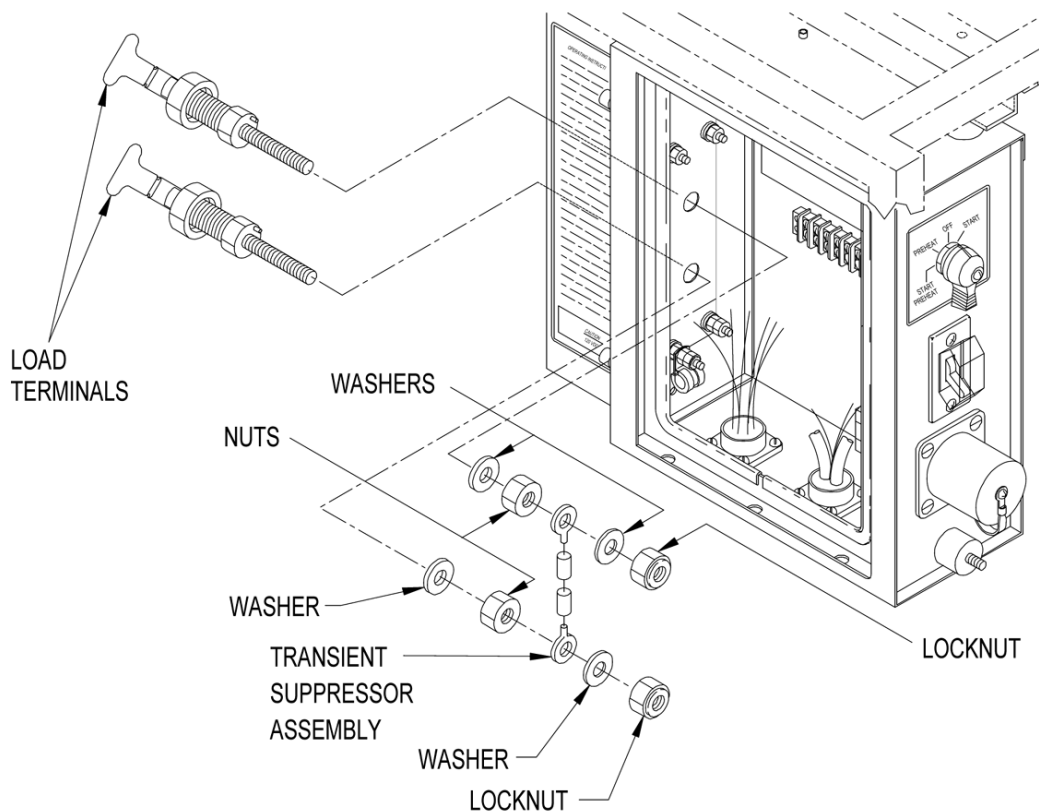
Load Terminal(s) (MEP-501A and Mechron Sets).
